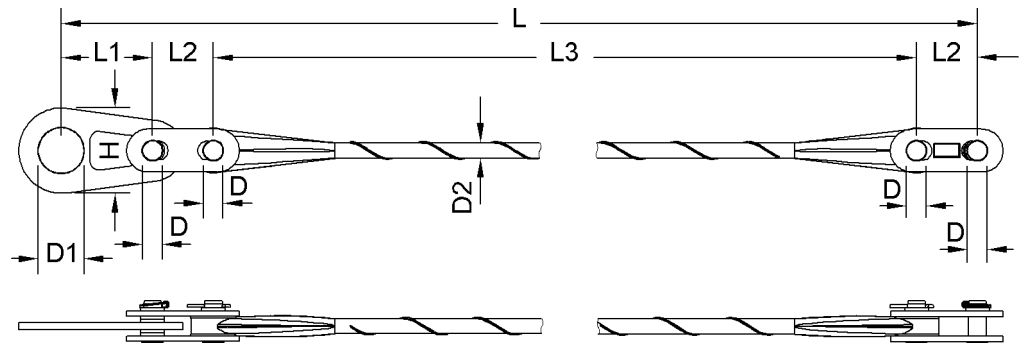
Dimensions of jib pendant strap on 1916 jib head section
